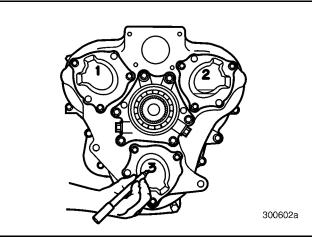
Mark Rear Countershaft Bearing Covers for Placement
